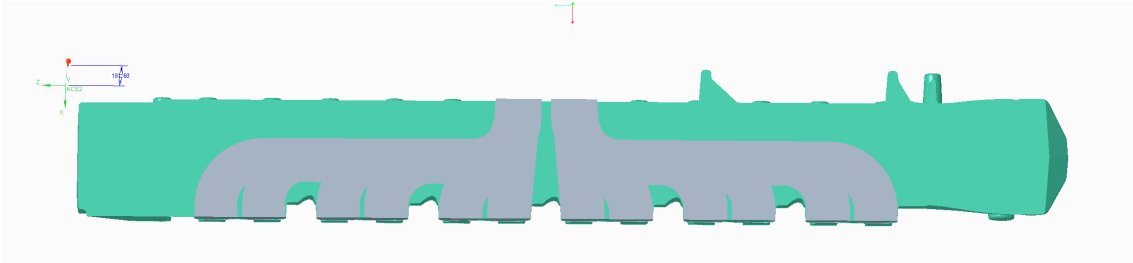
CAD of Mid Mounted Turbo Exhaust Manifold
